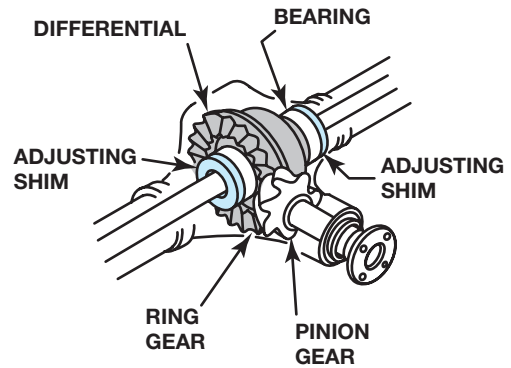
The sizes of the left and right shims are used to adjust ring gear backlash and bearing preload.
